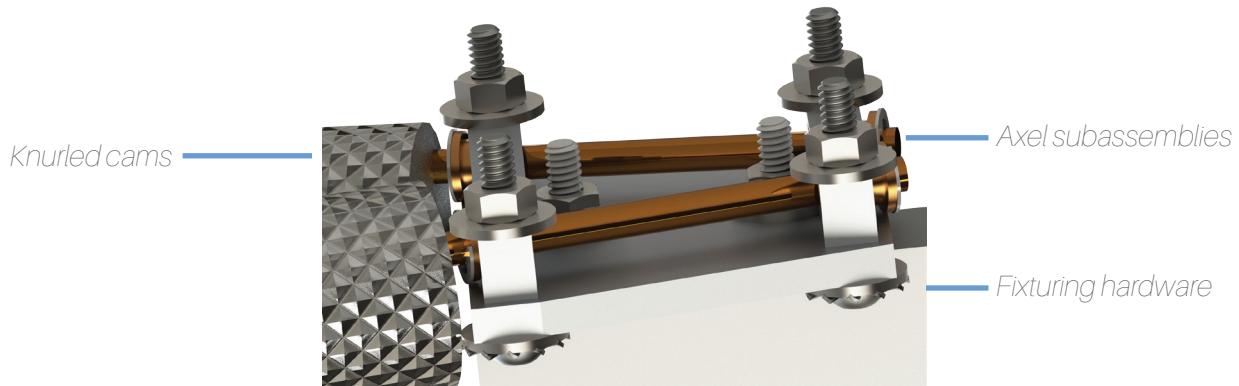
This view shows the underside of the assembly that constrains the axels responsible for allowing the cams to rotate. Pictured above are the flanged bushings, the retaining rings, and the various fixturing elements that hold the subassembly together
